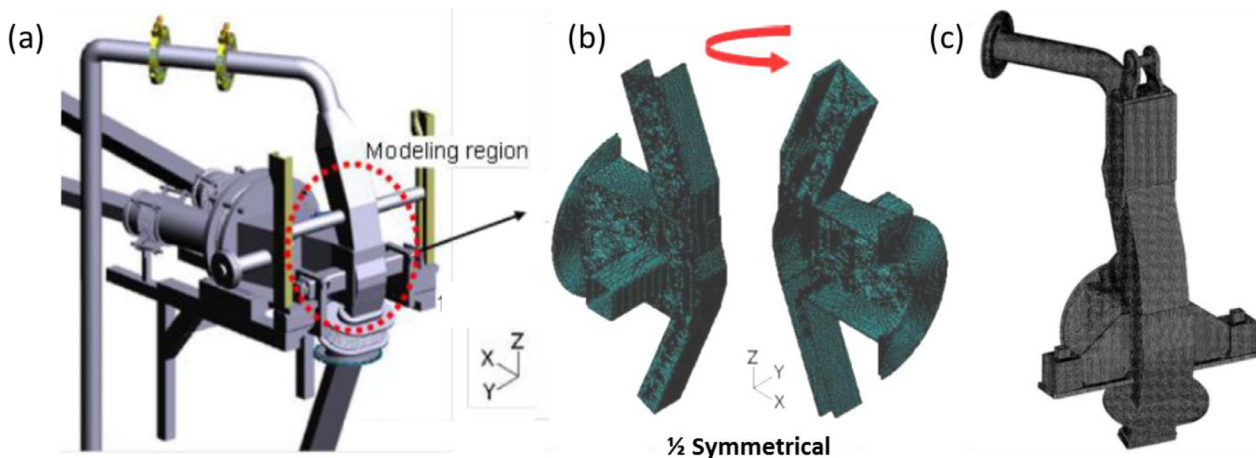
(a) CATIA CAD model, (b) and (c) ABAQUS mesh model of target assembly.
